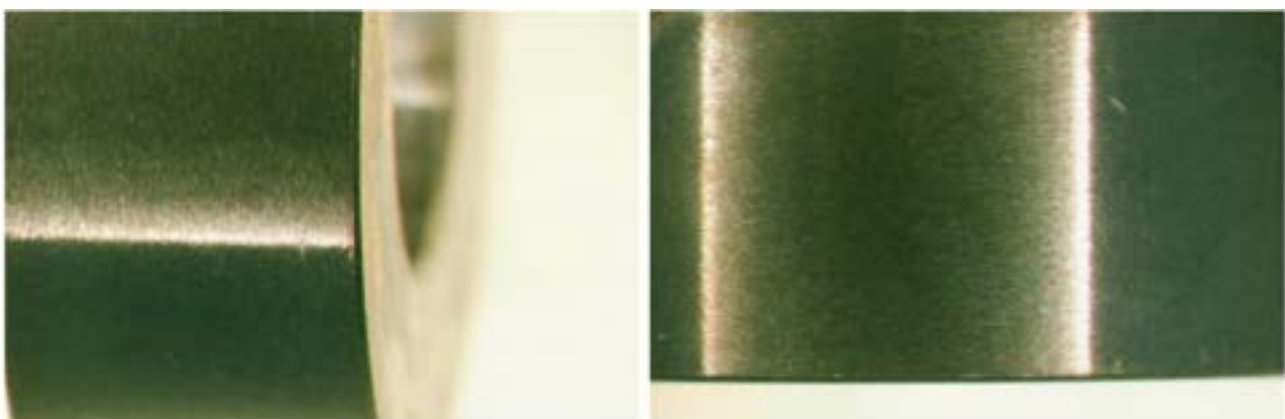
visual inspection of the surface of tested specimen n°23 (F82H). Left: overall view; right: external (cylindrical) surface, from the top
